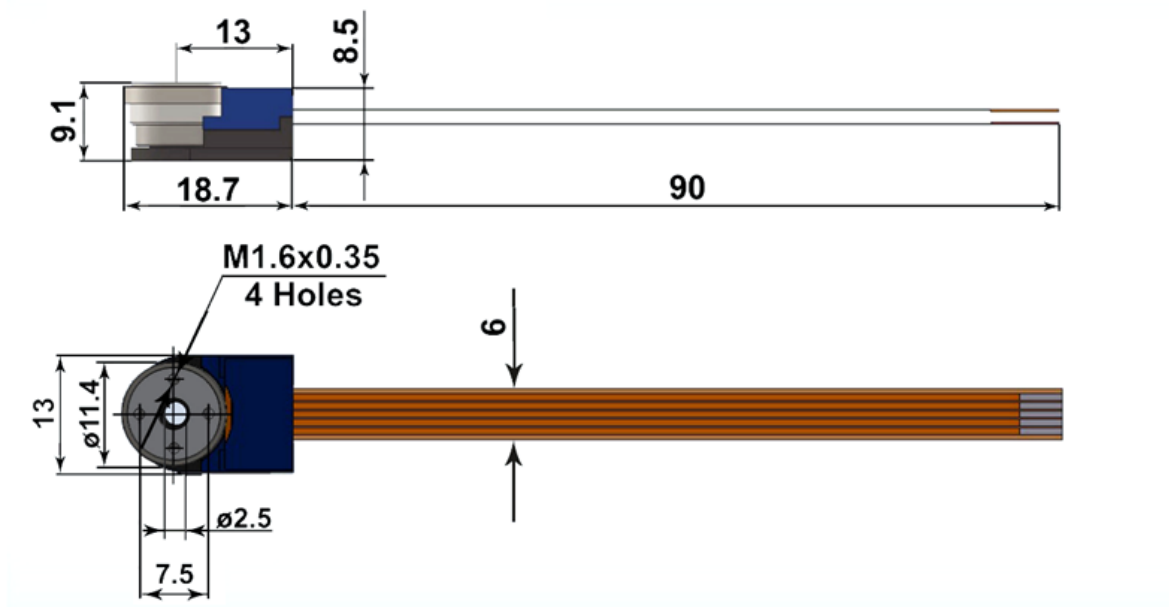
ROMO piezo actuator with factory-fitted encoder. Dimensions (mm)
